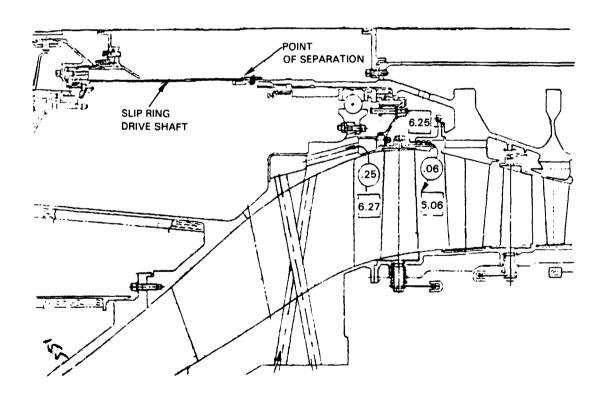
High-Pressure Compressor Rig Slip Ring Drive
